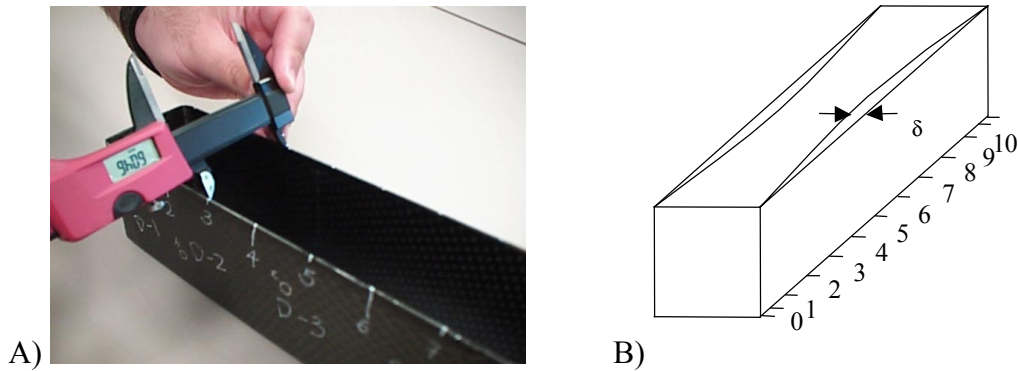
A) Measurement of flange-to-flange distance (W) with a digital caliper, B) Schematic of flange spring-in, δ , of the rib before sectioning
